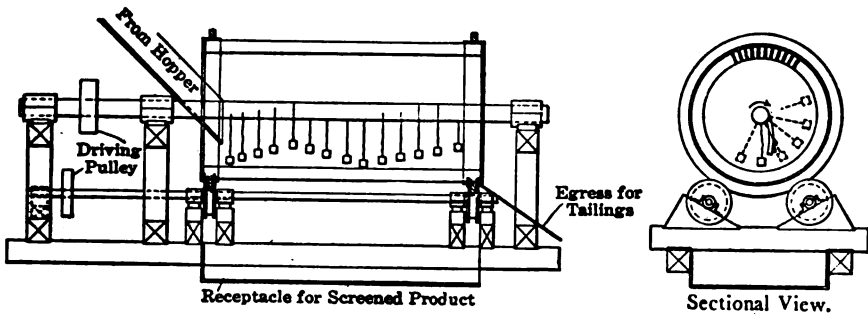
QUINNER DRY PULVERIZER AND SEPARATOR.
